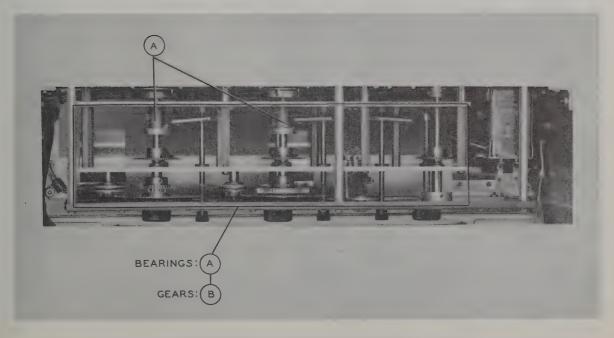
Lubrication of Dial Gears, R-F Oscillator O-91/FRT-5.
